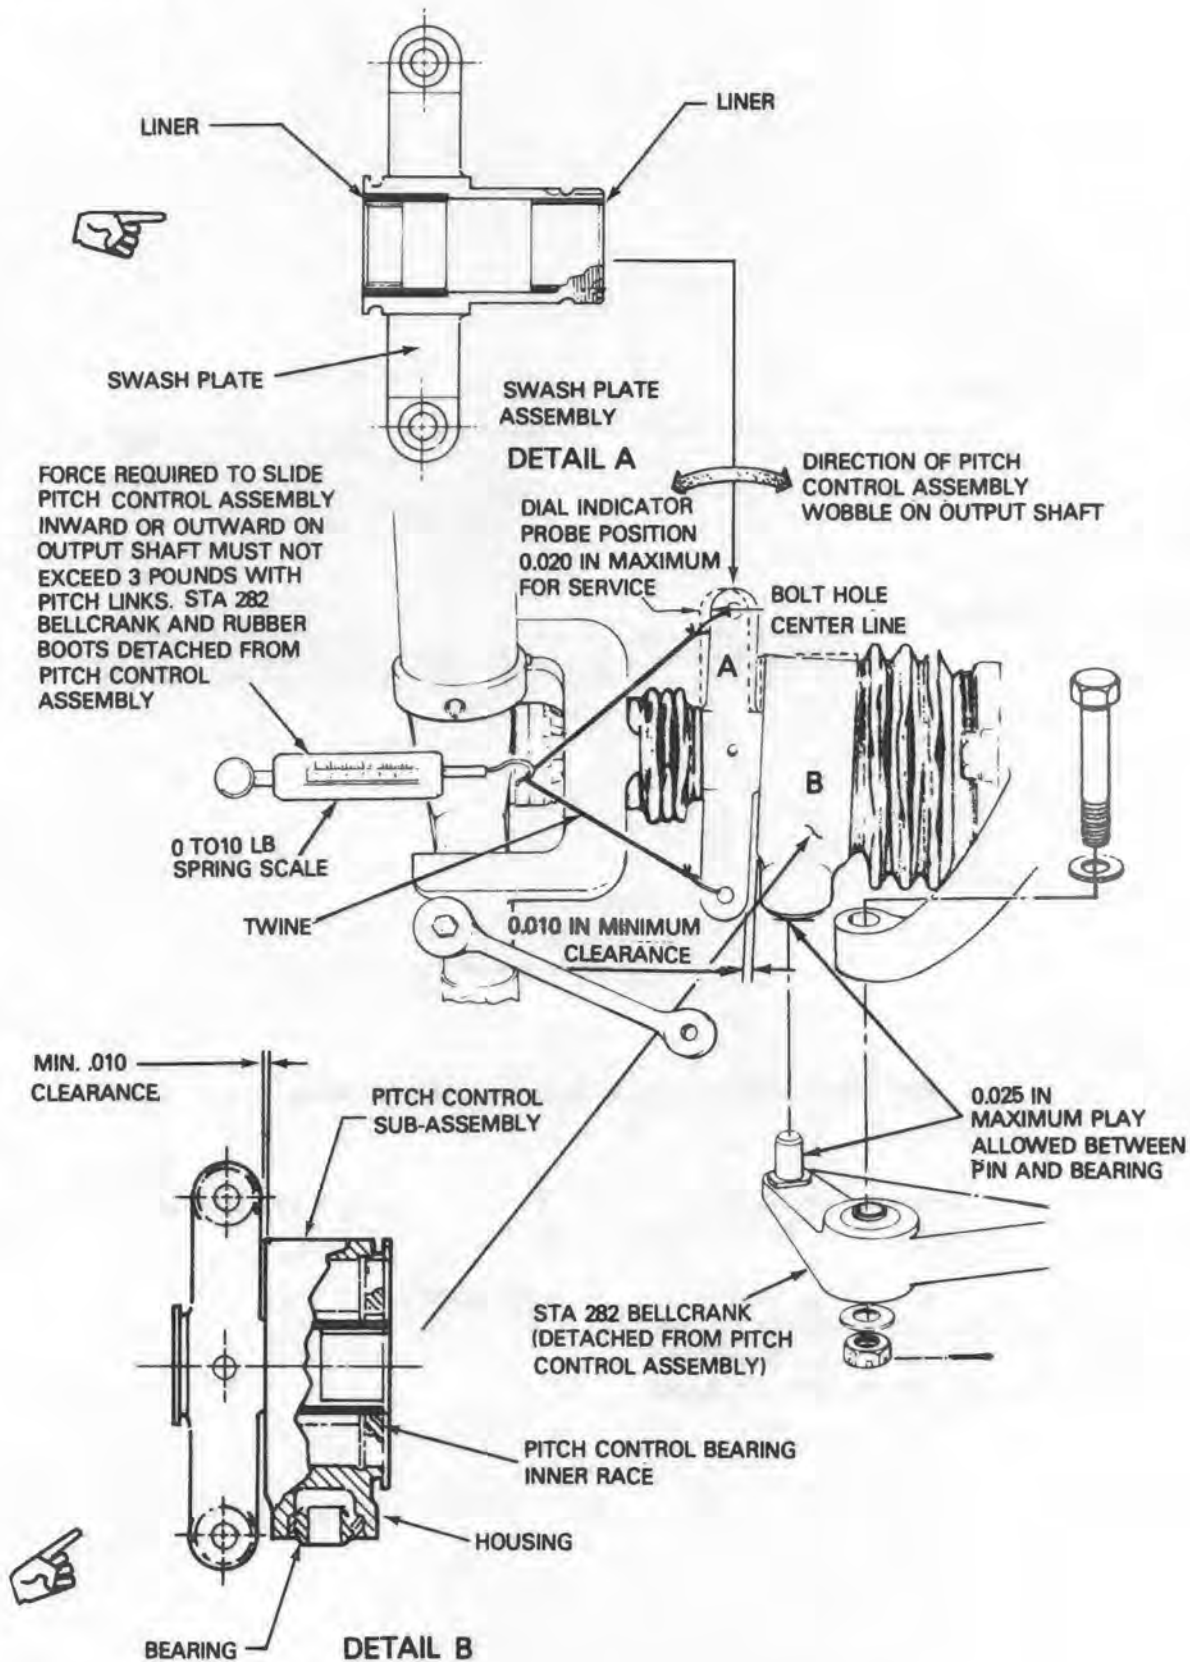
Tail Rotor Pitch Control Assembly Inspection
